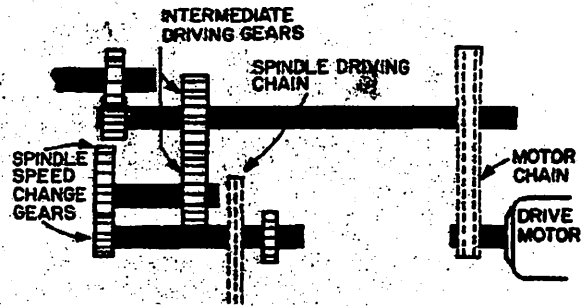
Motor, shafts, and gears of a typical power transmission arrangement in a machine tool.
